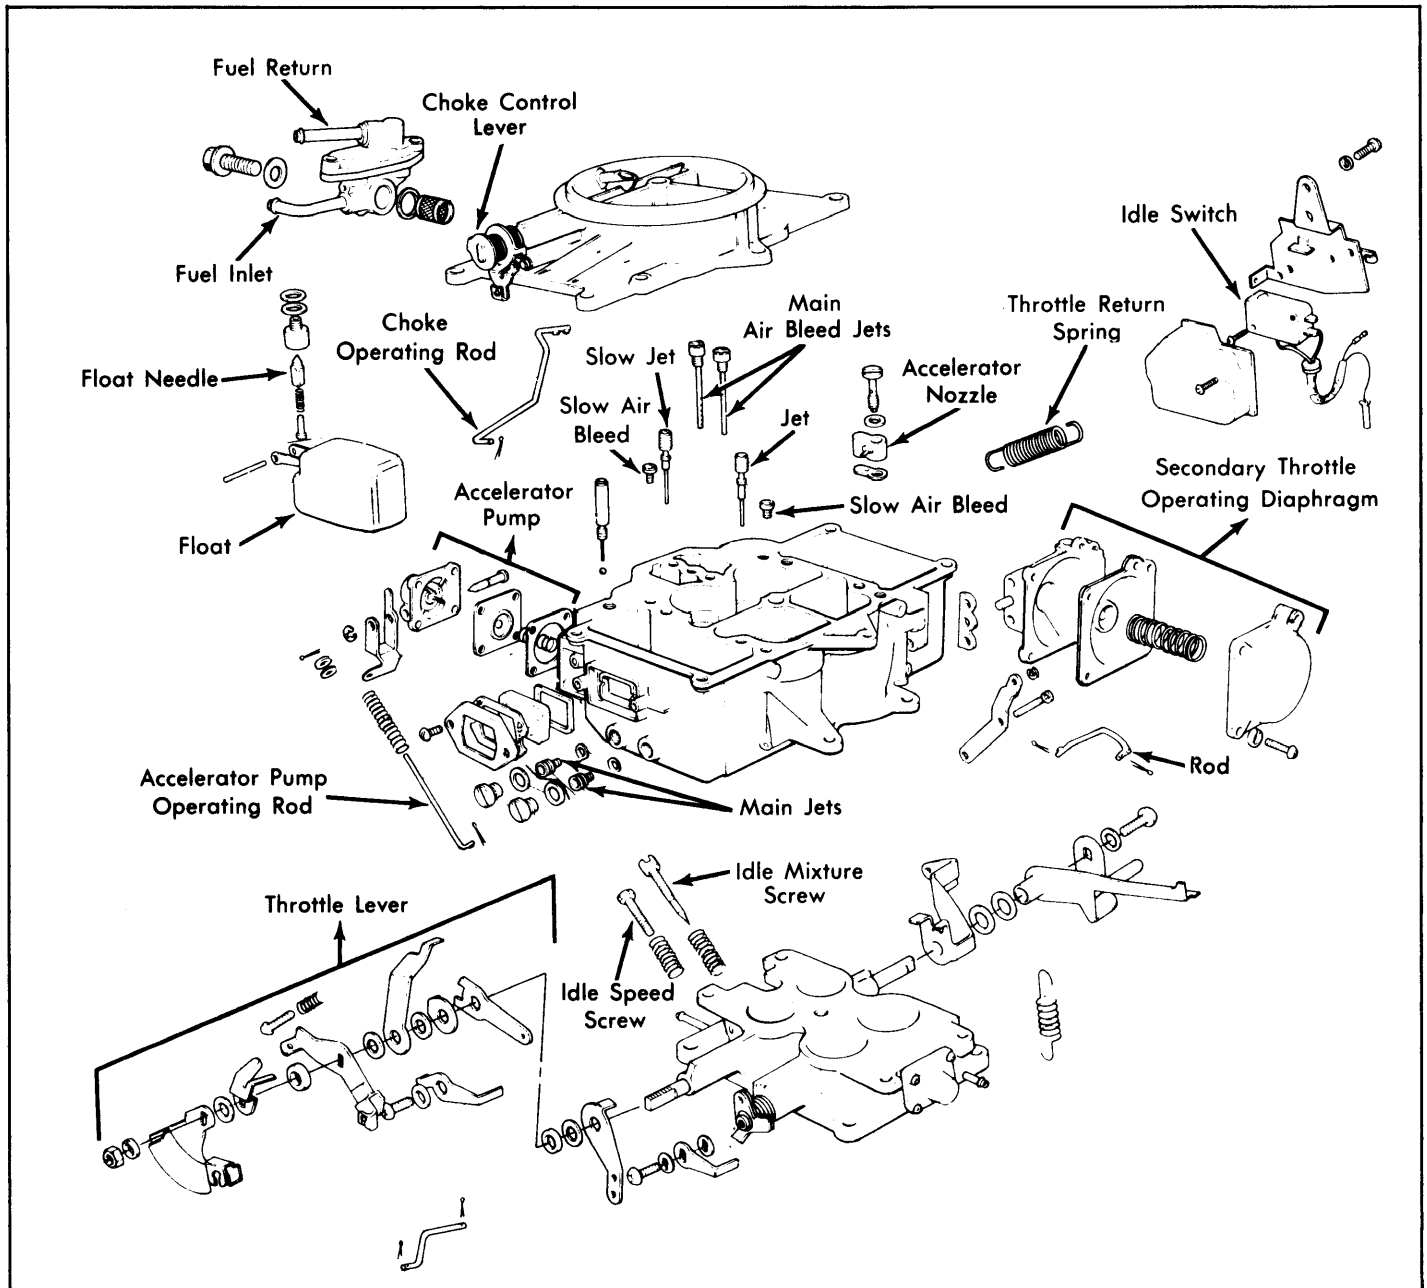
Exploded View Of Zenith-Stromberg 4-Barrel Carburetor (RX-2 & RX-3)
